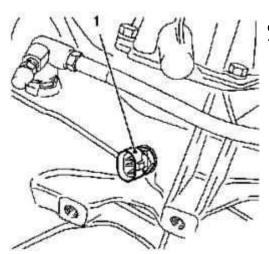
Wiring harness connector switch reversing lamps: 1 - connector
